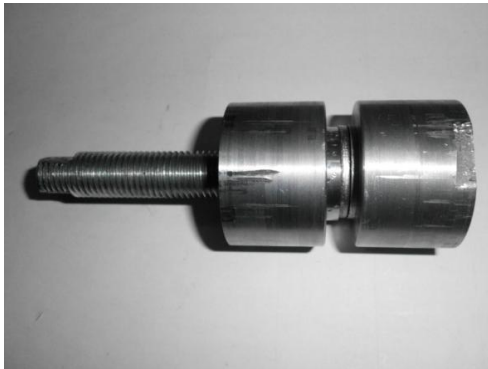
Second (right) cylinder screwed onto the threaded rod.
